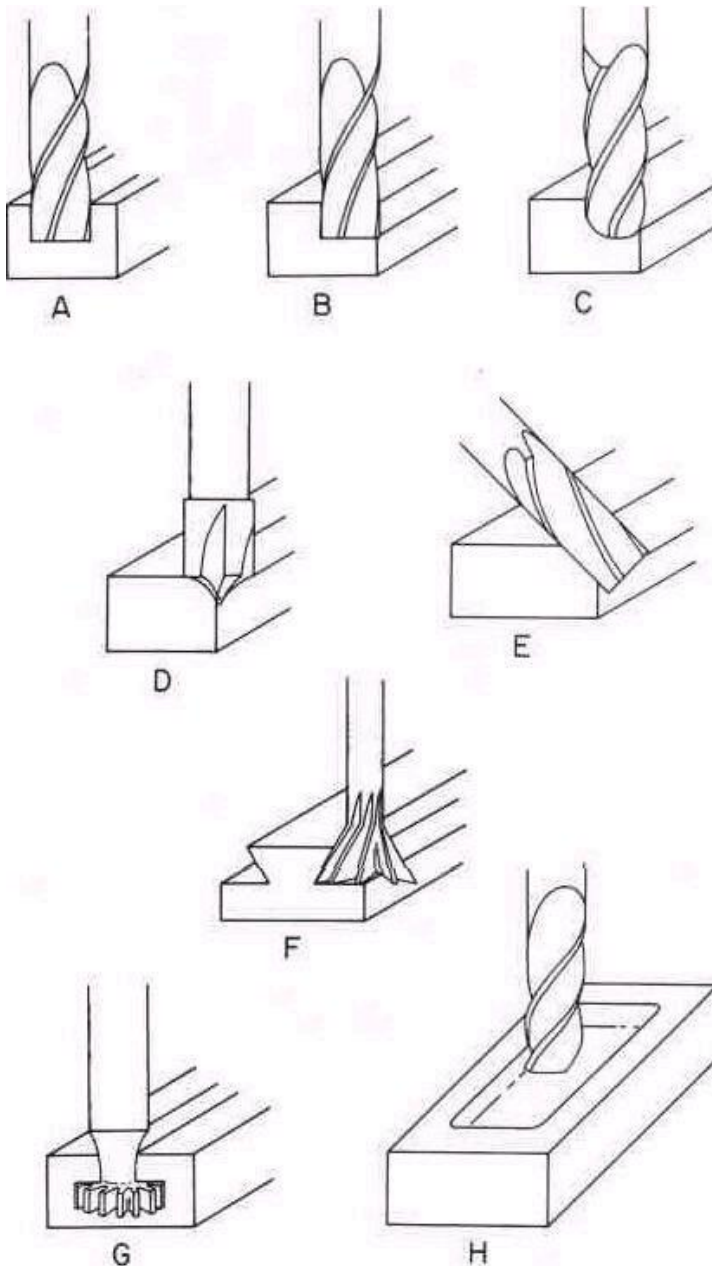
Commonly performed end-milling operations: (A) slot or groove, (B) step, (C) concave radius or fillet, (D) convex radius, (E) angled surfaces, (F) dovetail, (G) T-slot, (H) pocket.
